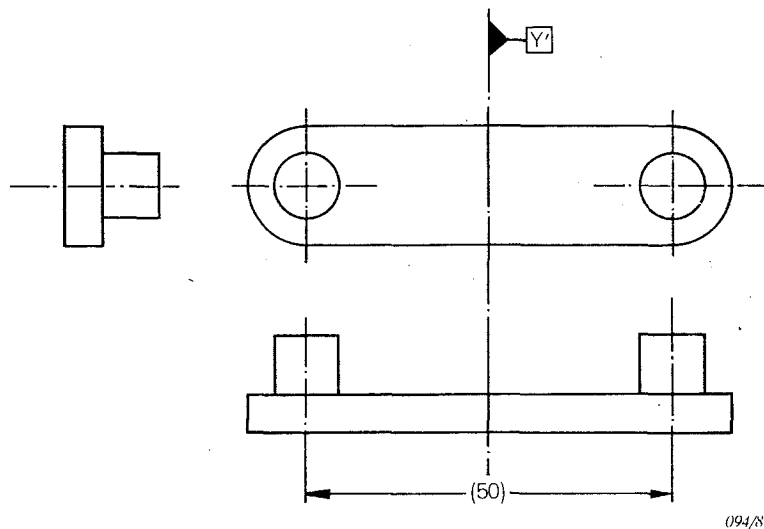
Example of a part with two pins that should match with the part given in Figure A2a.
